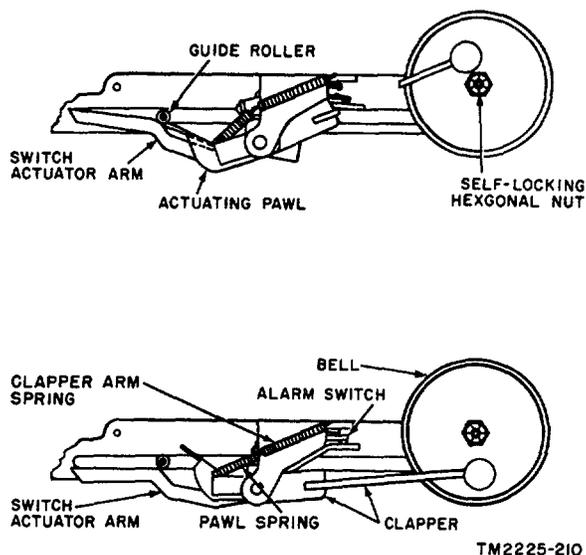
Warning bell and indicator switch Mechanism (TT-76A/GGC all subsequent models).
